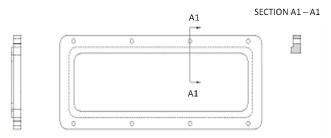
Jig design to produce holes in maintenance cut-out – 472mm by 140mm.
